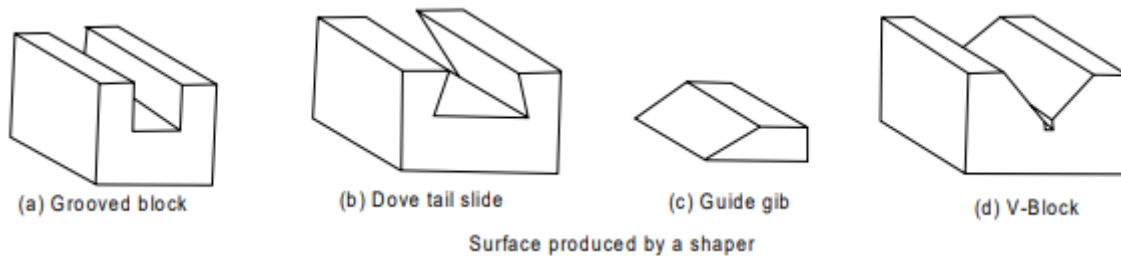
Shows Job surfaces generated by shaper(wordpress.com).
